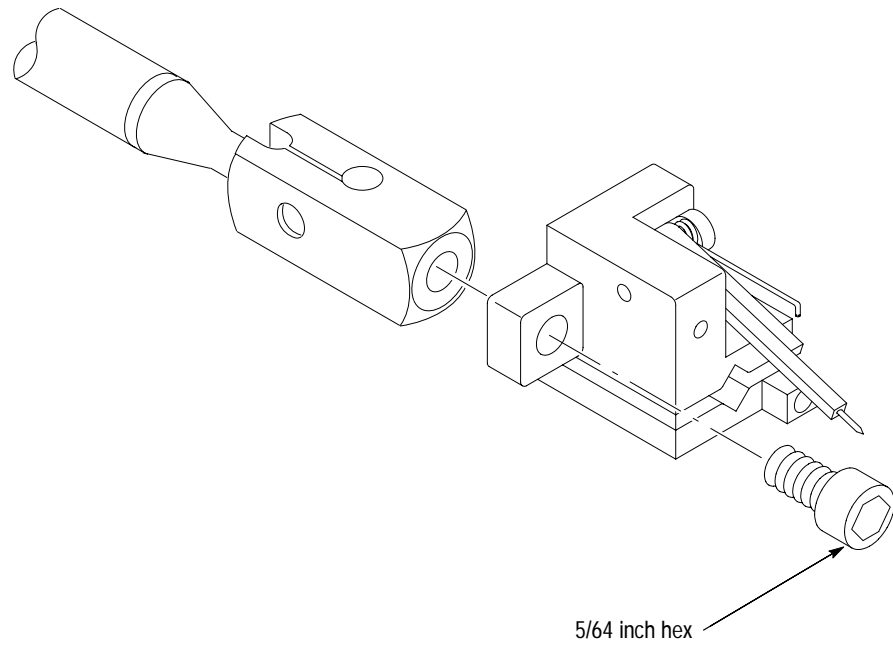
Attaching an Adjustable Ground Pin Assembly to the Articulating Arm
